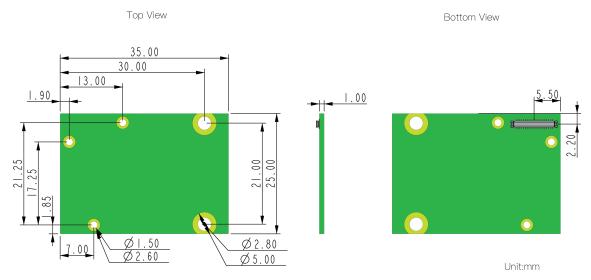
RAK14002 WisBlock 3-channel Touchpad Mechanic Drawing
